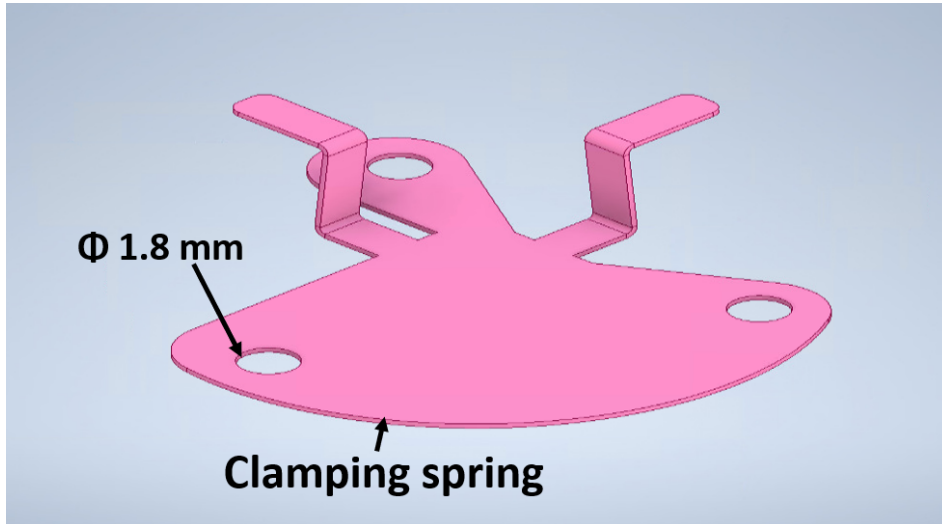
a) CAD drawing of the plate with clamping spring used to mount the Si chip of $10 \times 10 \text{ mm}^2$. It has 3 holes with diameter of 1.8 mm to fix it to the heater block.
